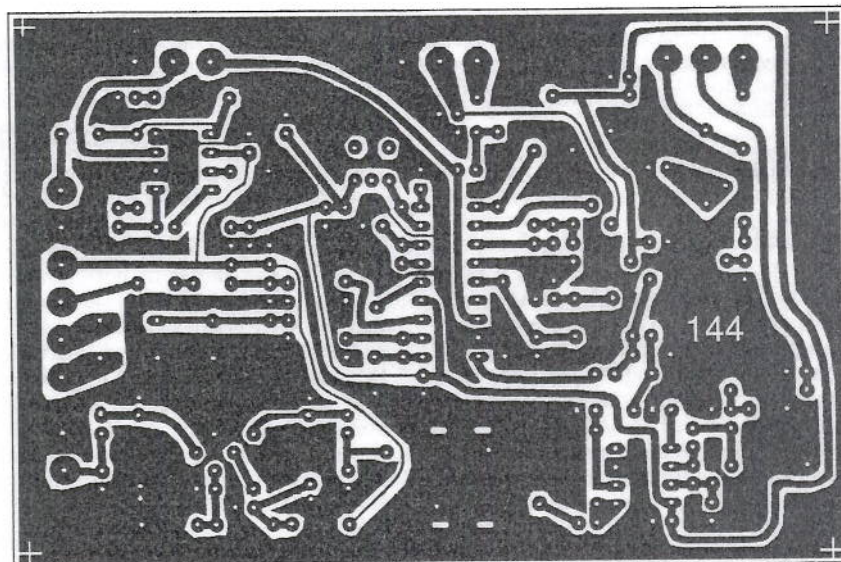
Receiver printed circuit board component layout and full size copper foil master pattern.
